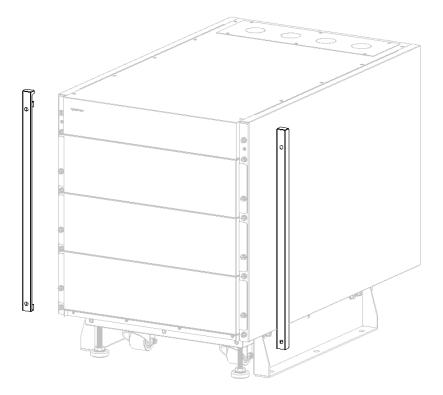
Removing the Battery Cabinet Front Perimeter Strip Brackets
